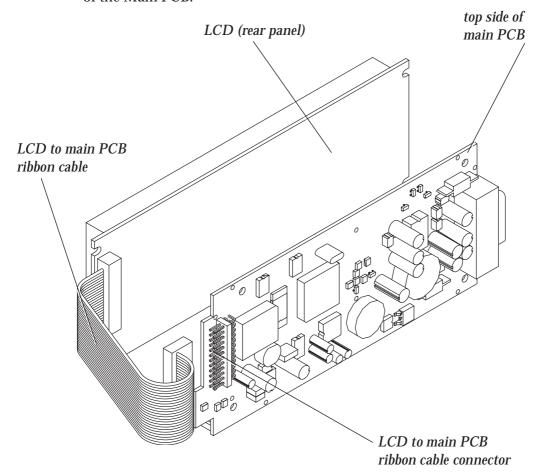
Connecting the LCD to Main PCB Ribbon Cable
